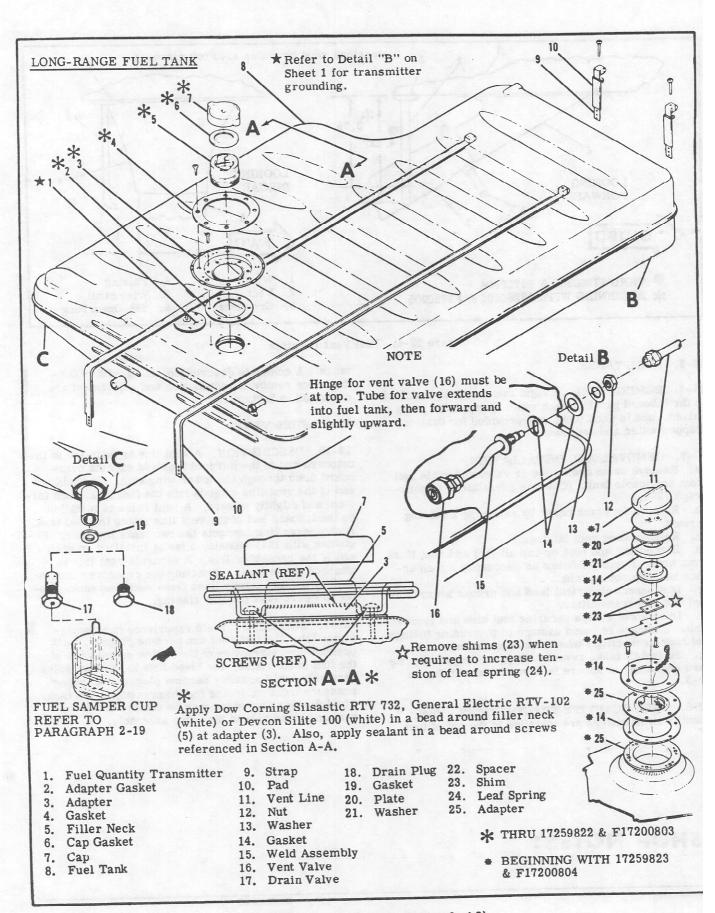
Fuel Tank (Sheet 2 of 2)
